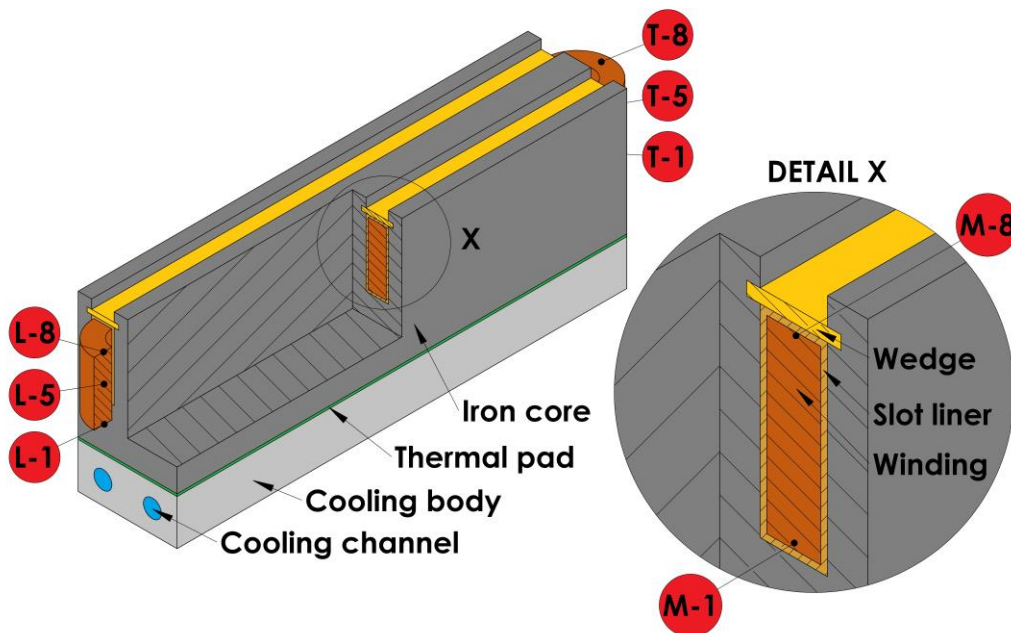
Overview of the motorette assembly and local winding sensor locations.
